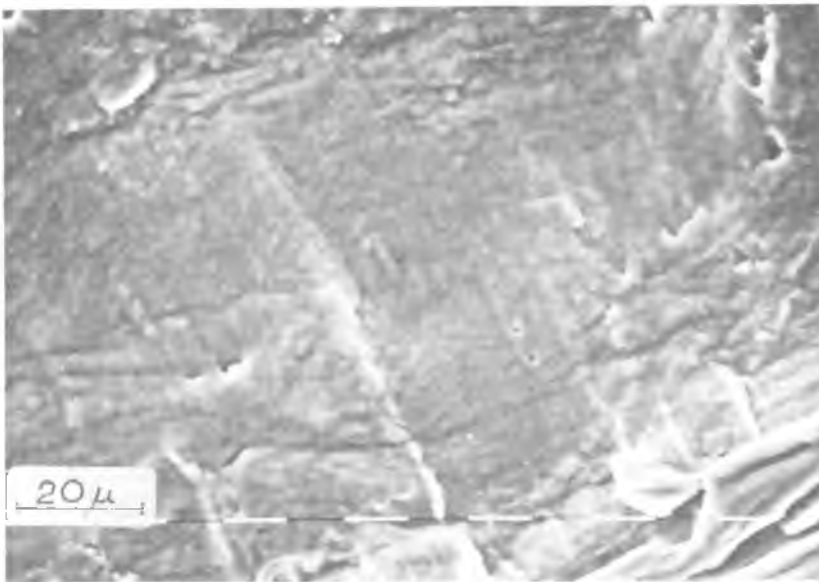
DIN 1.4550: fracture surface of a thermal fatigue crack.
